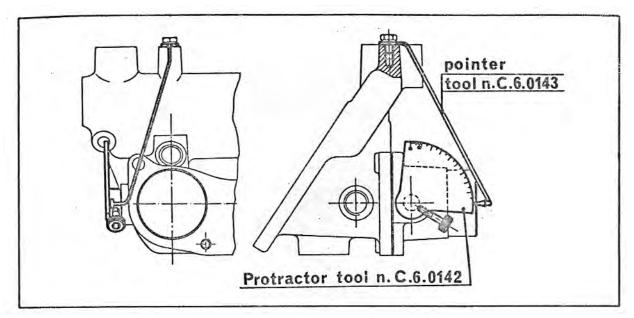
CHECKING THE THROTTLE OPENING ANGLES
